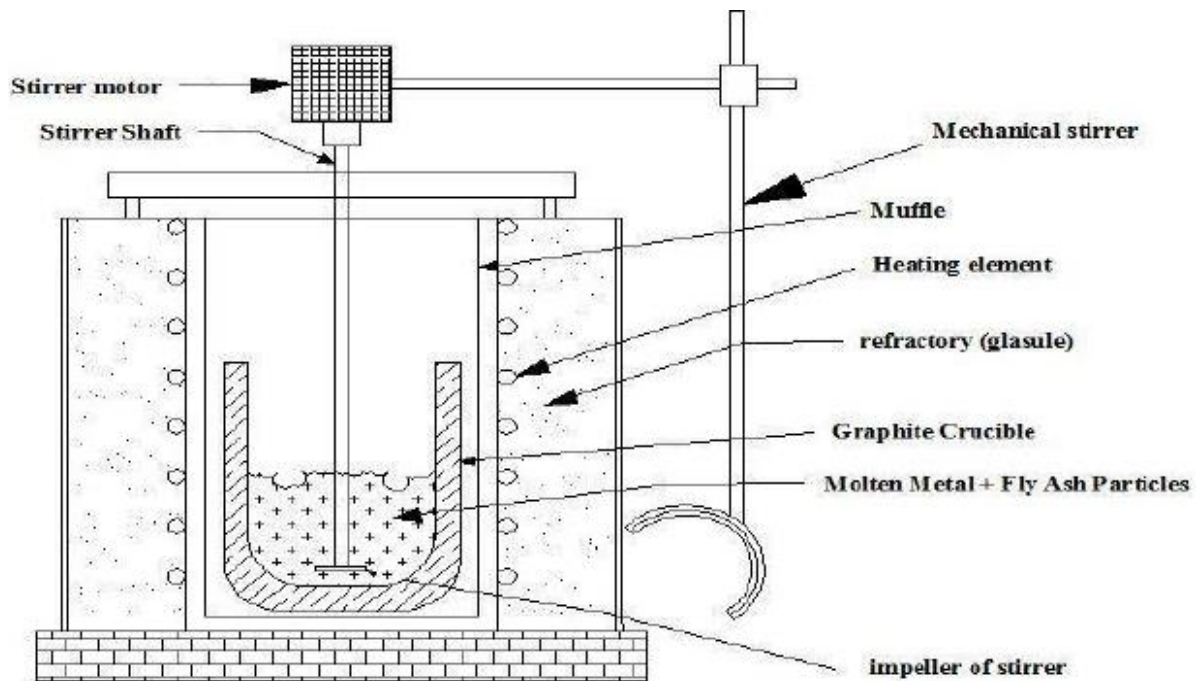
Schematic Stir casting apparatus (Kant and Verma, 2017)
